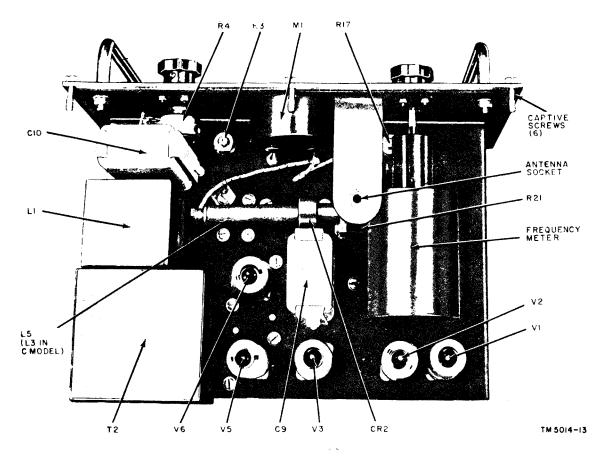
Test Set TS-538(*)/U, top view of chassis.
